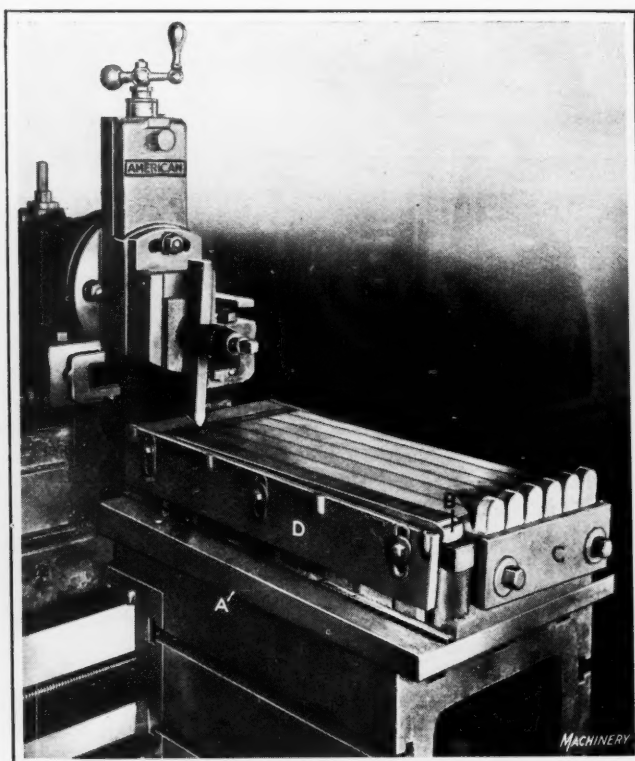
A 24-inch Shaper equipped for planing the Tapered Face of Gibs held on a Magnetic Chuck
